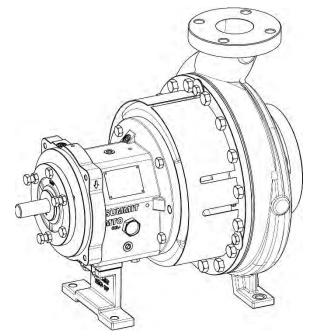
Guard installed using Casing Jack Bolt Fastening
